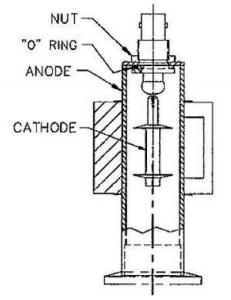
Older Style 525 Cleaning or Replacing Cathode
